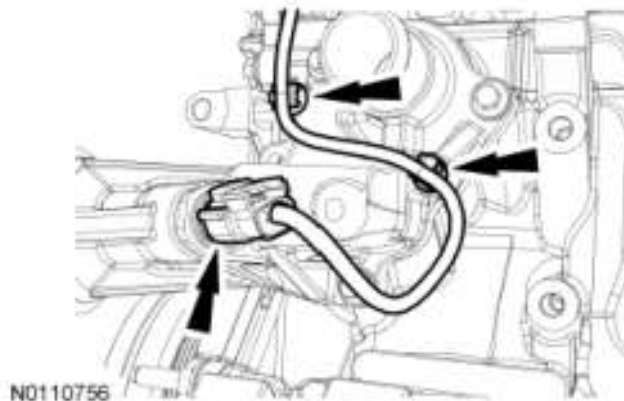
Locating Engine Wiring Harness Position Retainers On LH Valve Cover
